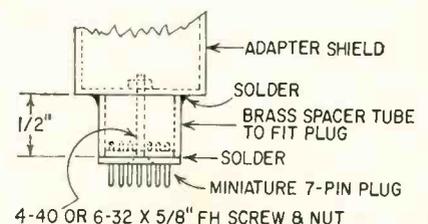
Modification to bottom of adapter to make it fit tube sockets with integral shield bases. If tube was shielded, use shield-base socket for tube at top of adapter (J in Fig. 4)
